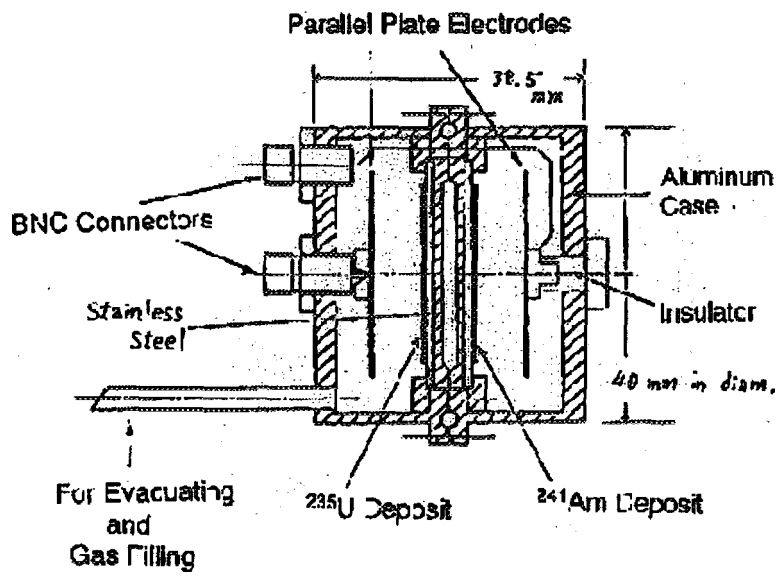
Cross sectional view of back-to-back type double fission chambers.
